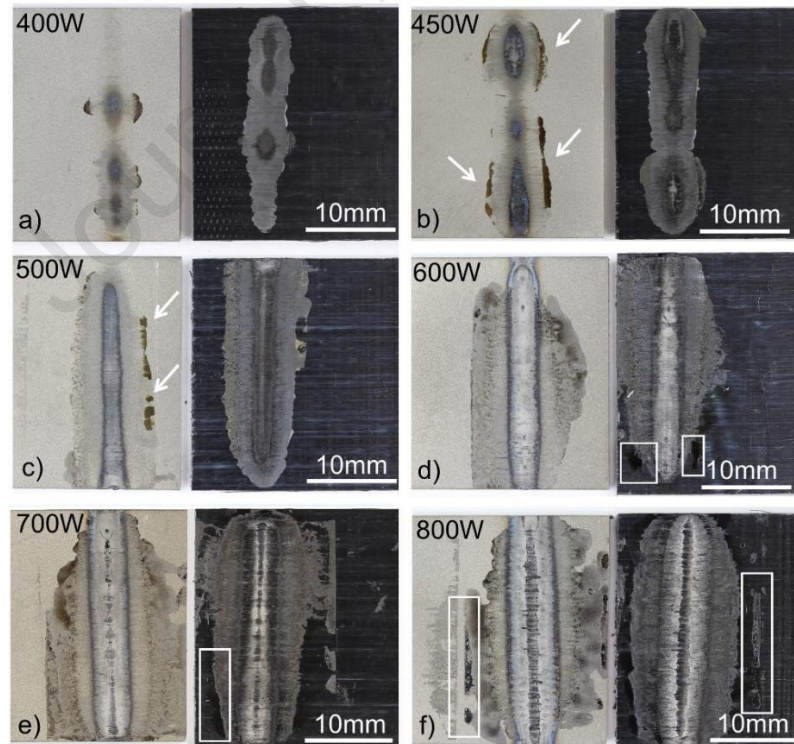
Fractured surfaces of the examined CF/PEEK-Ti joints after the examined laser joining.
